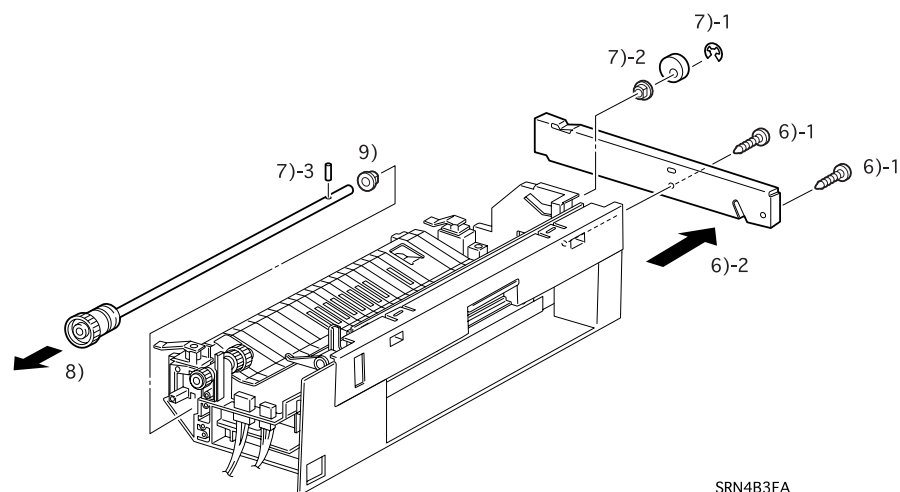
CLEANER CAM ASSEMBLY Removal
